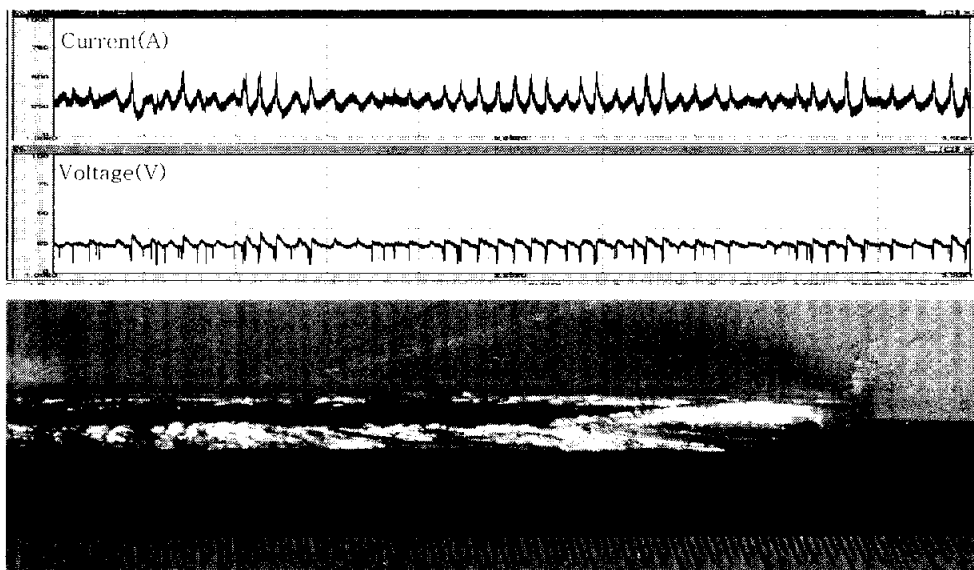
Waveforms and bead shape at welding current 299A
